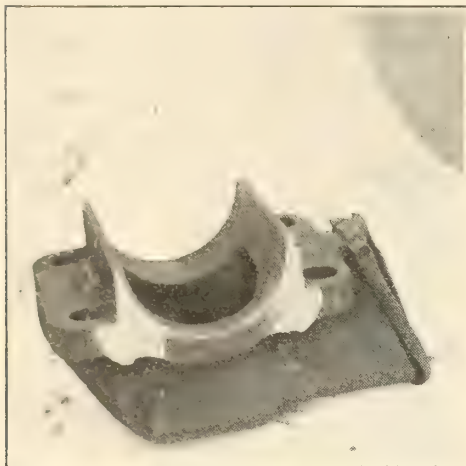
Repairs to Worn Shoulder on Axle Bearing Cap.
